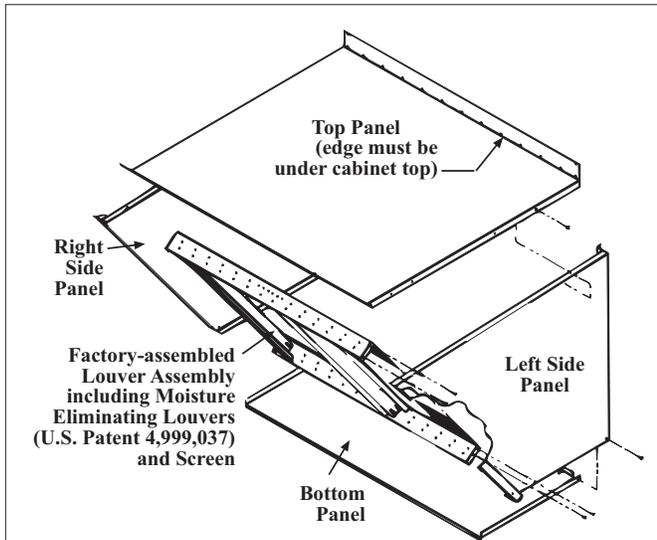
A - Assembly Drawing of Option AS2, Outside Air Hood Without Filters
